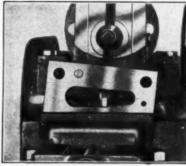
A bench shaper makes a quick job of this die block after drilling a few holes and a little hand sawing.
